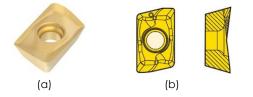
(a) SECO tool insert, (b) schematic diagram [15]
